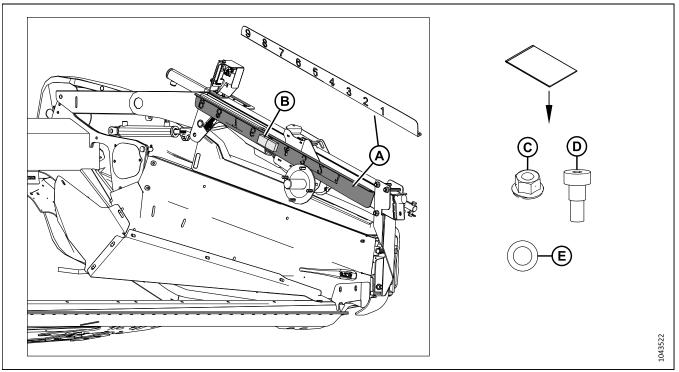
Fore-Aft Indicator Shipping Location, Parts Bag MD #368002
